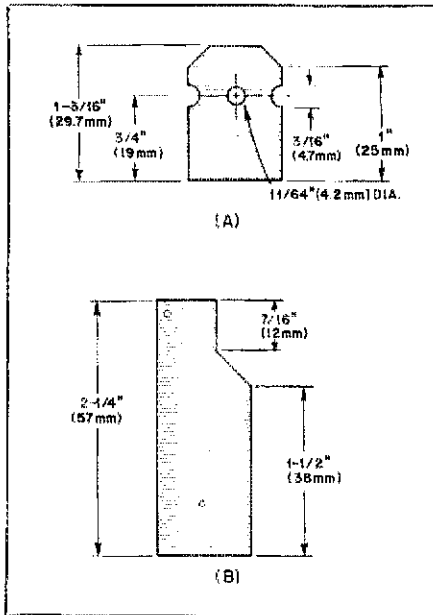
Templates for making the heat sinks for Q8 (at A) and Q9 (at B). The material is 3/32-inch (2 mm) thick aluminum. The heat sinks are attached to the circuit board with no. 2-56 fasteners.
